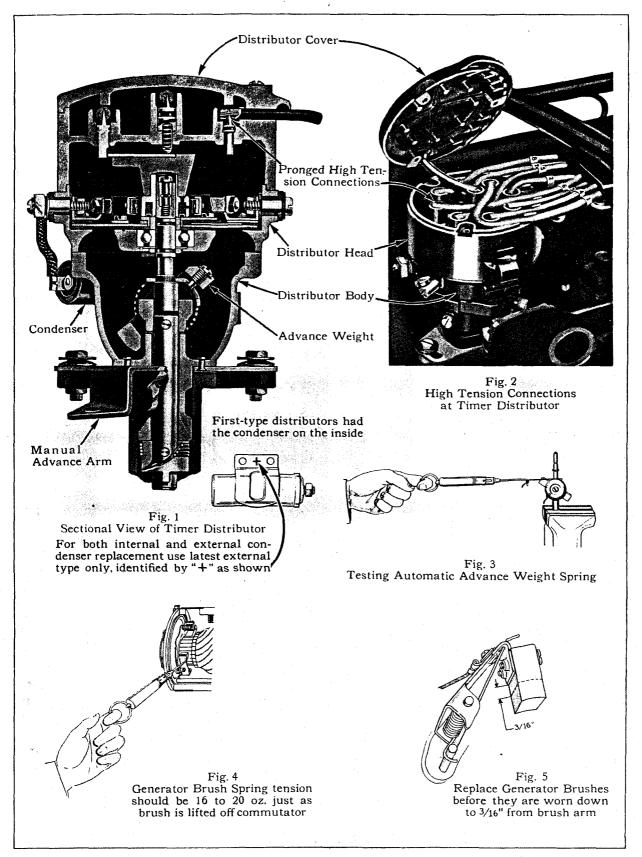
Ignition and Generator Details Cadillac 353—La Salle 340
